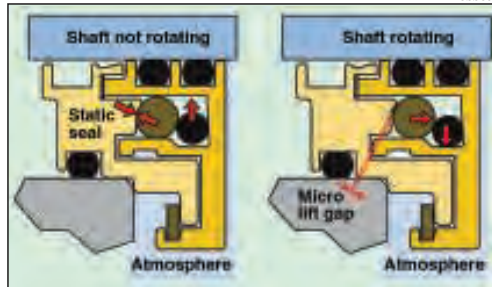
Shown here is a half-section of a modern bearing housing protector seal — with the shaft not rotating (left) and with the shaft rotating (right)
